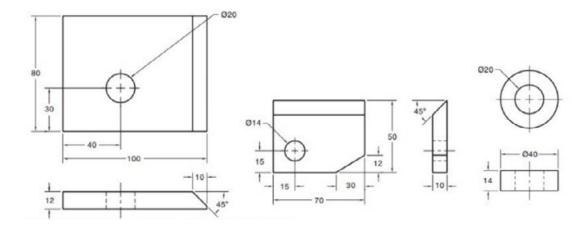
Drawings of each part of the welded subassembly
